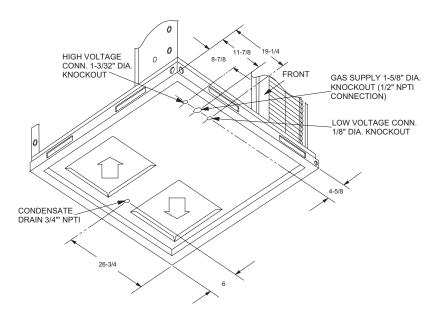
UNIT DIMENSIONS - FRONT & BOTTOM
